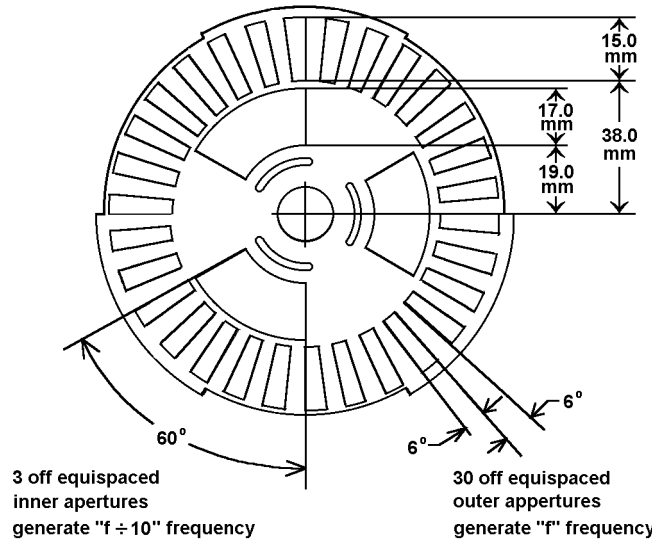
, Model 651-1 Chopper Blade Dimensions
